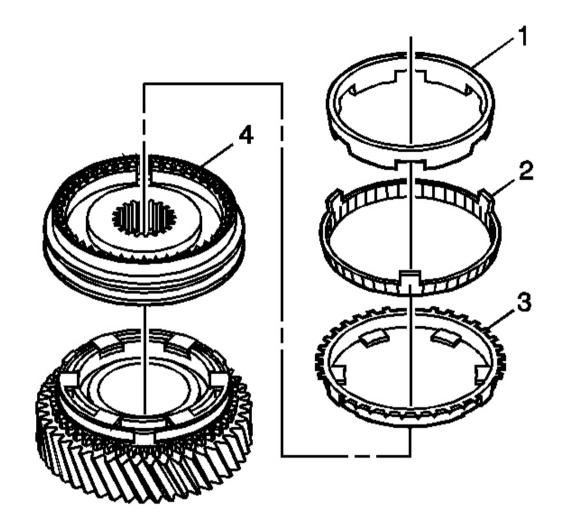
1st Gear Inner/Outer Cone, Blocking Ring & Synchronizer Assembly Courtesy of GENERAL MOTORS CORP.
